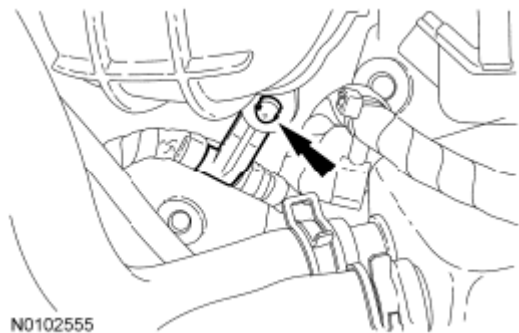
Locating Wiring Harness Pin-Type Retainer From Intake Manifold
